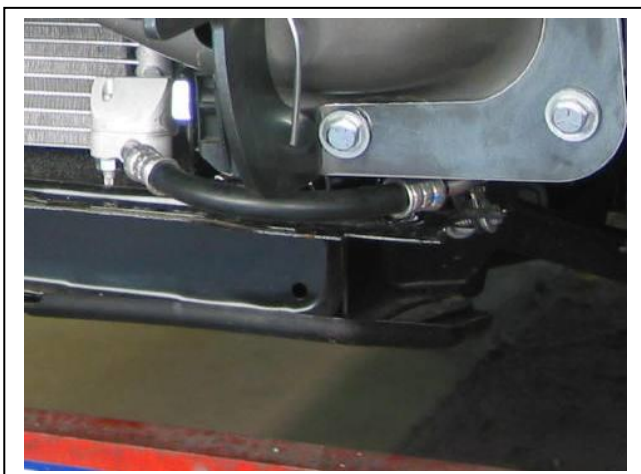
Check clearance between ECB steel mount and air conditioning pipe
